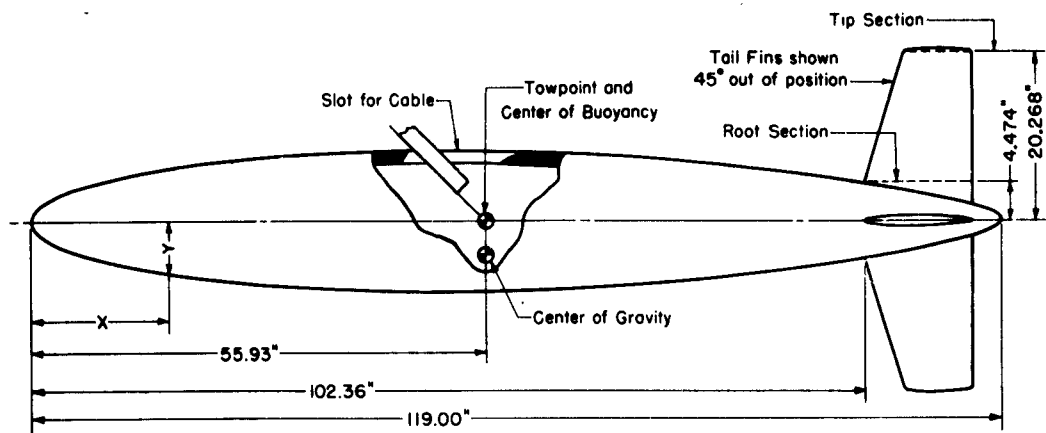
Principal Dimensions of the Air-Towed Sonar Housing
